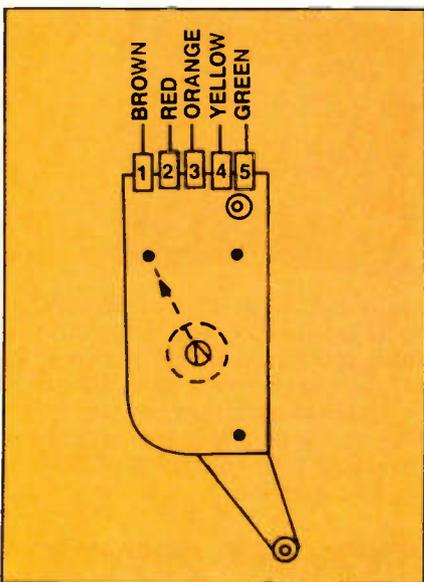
One of the first steps in installing the mode switch assembly is to manually rotate the gear on the mode switch until the pointer on the bottom of the gear shaft points to the black plastic guide.
